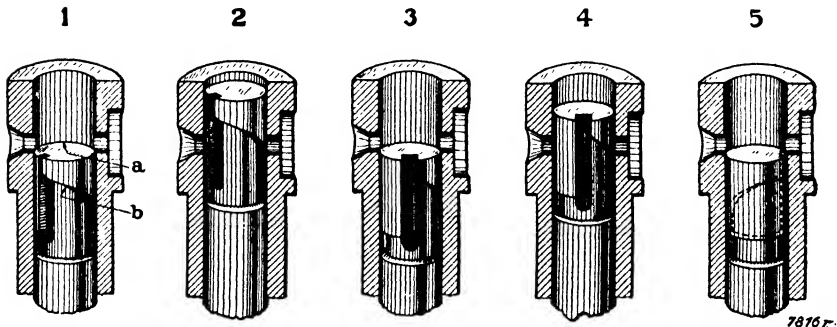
SECTION THROUGH THE BOSCH FUEL PUMP PLUNGER AND BARREL.
